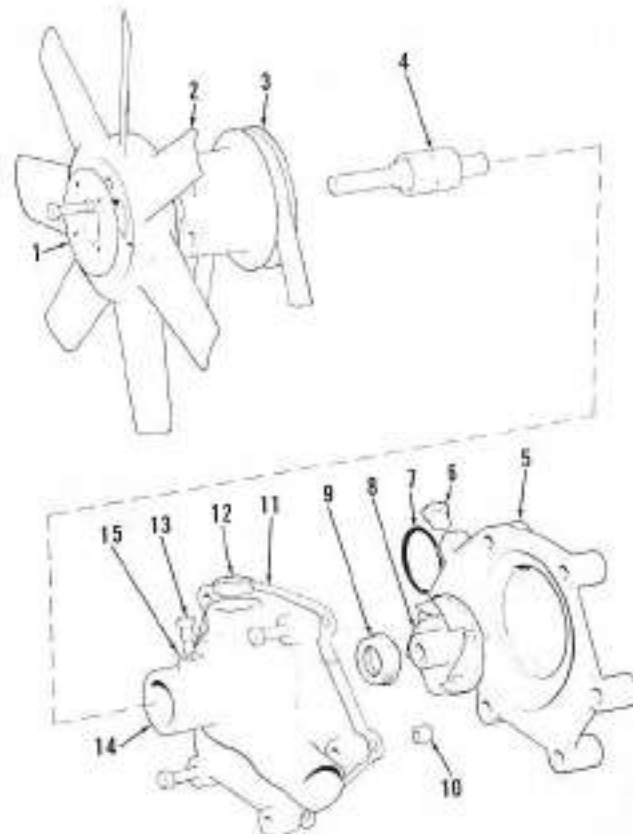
Exploded view of water pump used on 4-cylinder engines.
